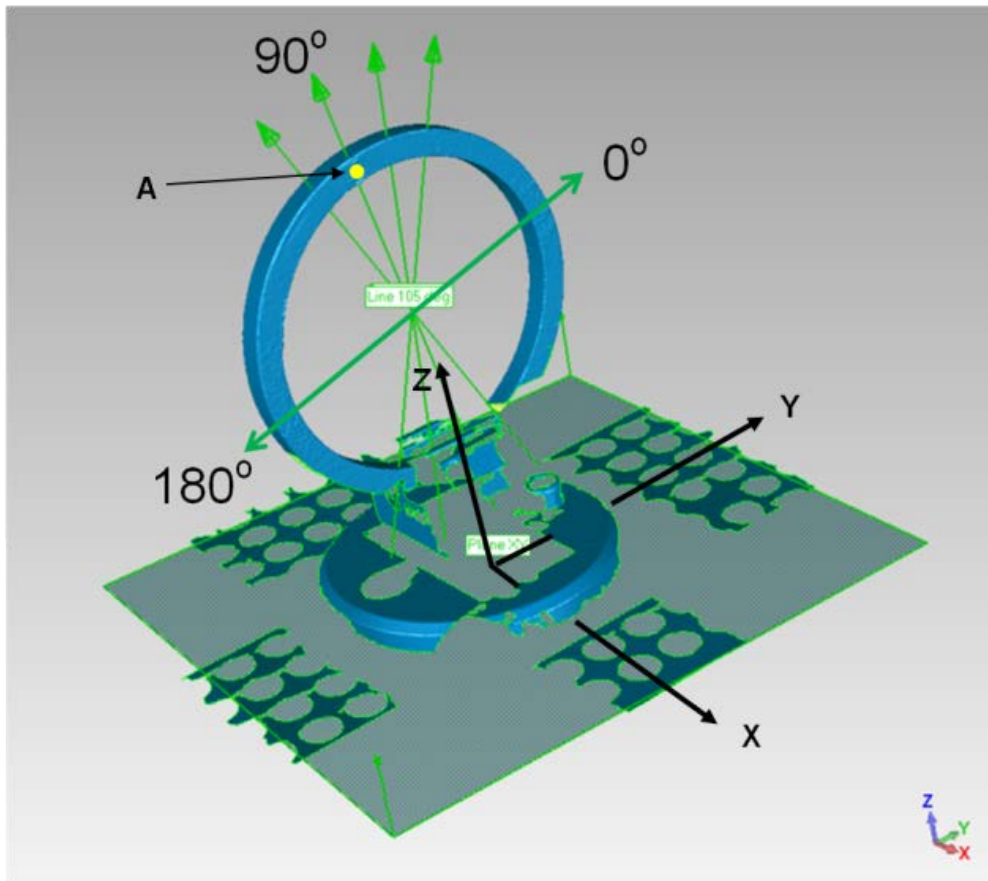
Three dimensional laser scan for Copper ring mounted on sample holder.
